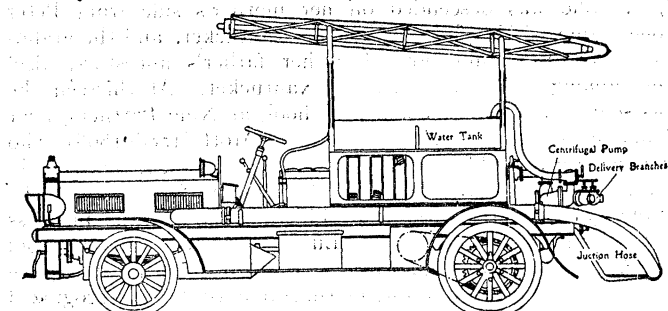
60 h.p. Six-cylinder Halley Fire-engine with Centrifugal Pump.
